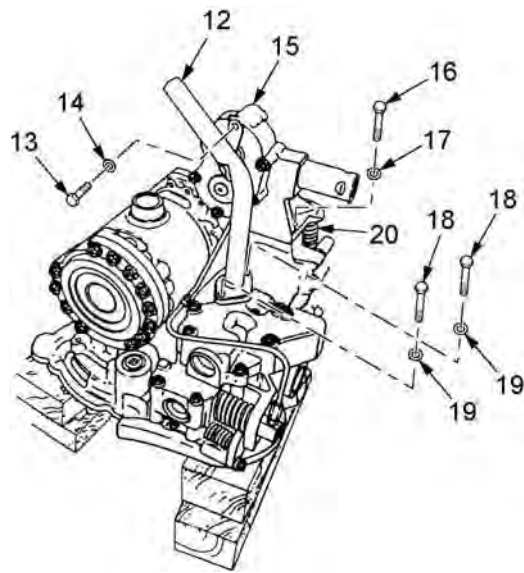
Output Oil Pump Assembly and Scavenge Tube Assembly Installation.
